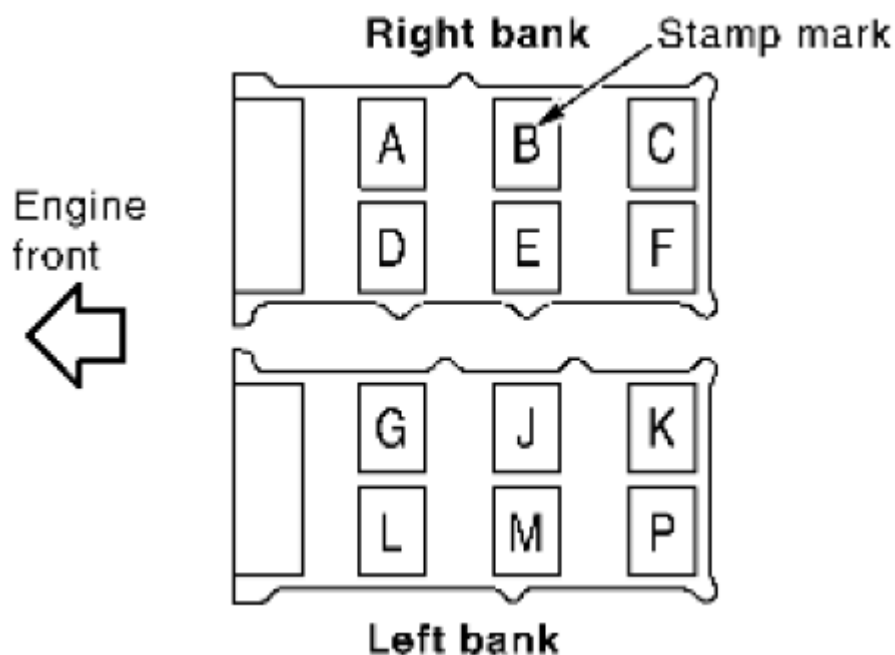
Aligning Stamp Marks On Camshaft Brackets
